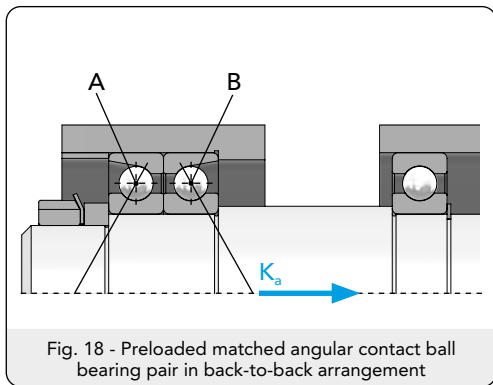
Preloaded matched angular contact ball bearing pair in back-to-back arrangement
